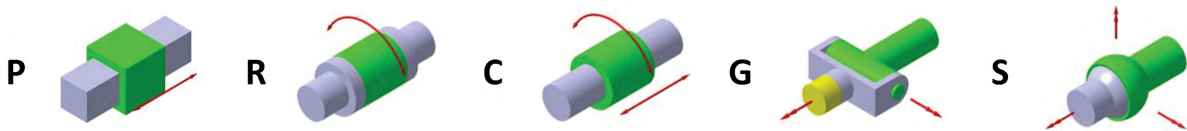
Basic joint types: the prismatic (P) joint, the revolute (R) joint, the cylindric (C) joint, the universal or gimbal (G) joint, the ball or spherical (S) joint
